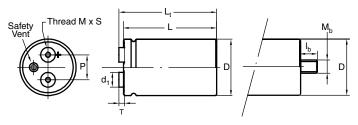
B: High current M6-18 mm disc and 1/4-28 UNF disc: Screw Terminal (ST) and Screw Terminal Bolt nut (STB)
